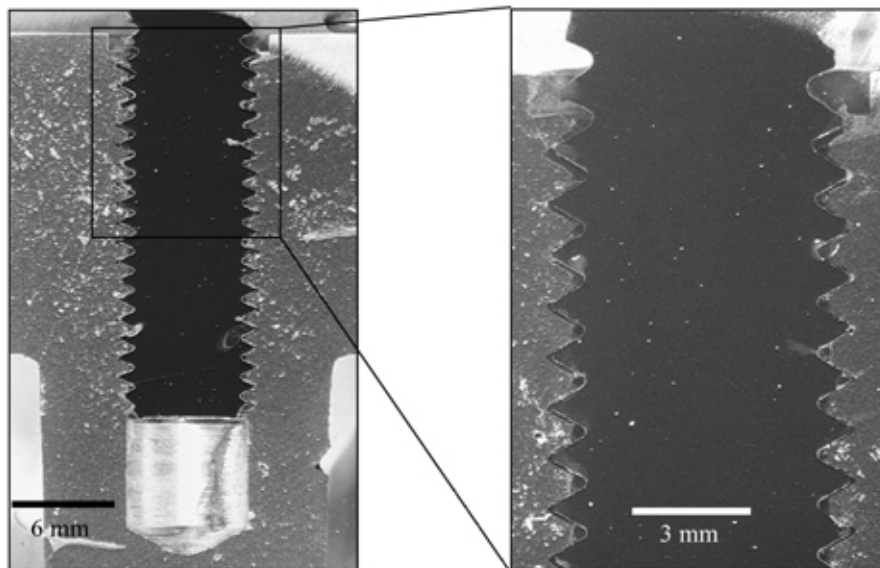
Optical microscopy of a cross section from an M6 standard machine fastener run into an as-cast aluminum nut specimen.
